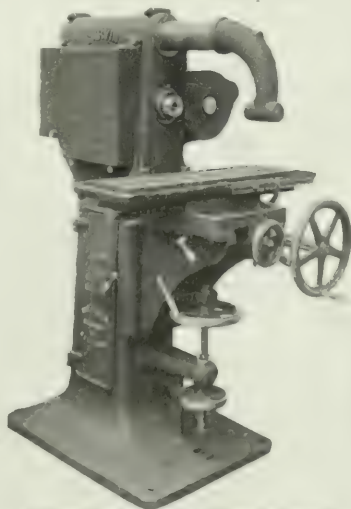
ELECTRICALLY-DRIVEN MILLING MACHINE.
